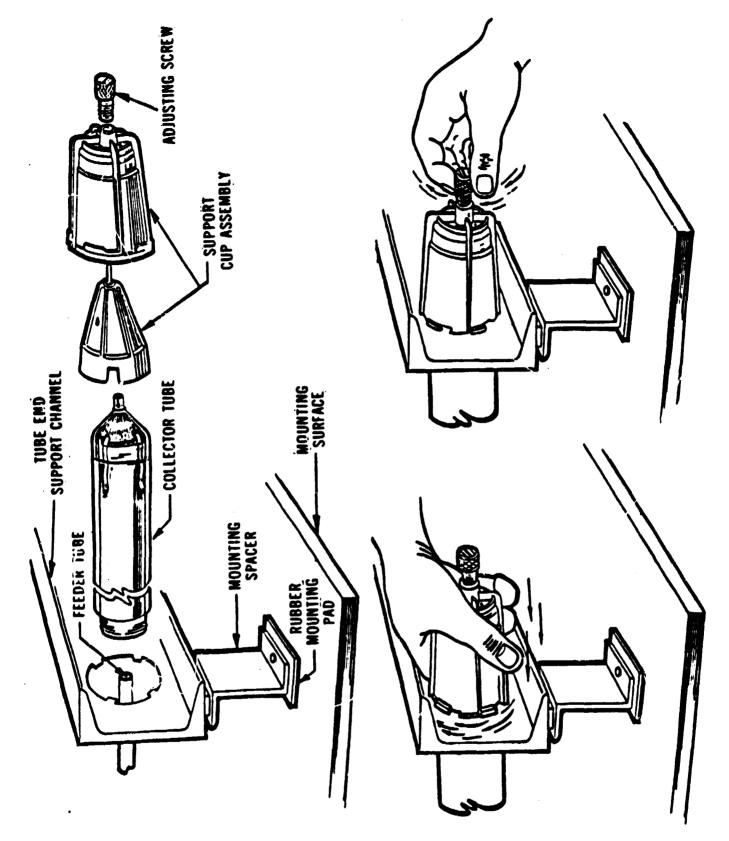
Collector Tube Installation. (Courtesy Owens-Illinois)
